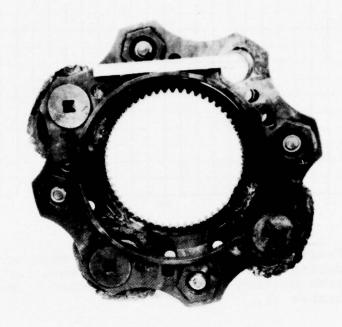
Lower planetary assembly after 25-minute loss-of-lube test of optimized transmission configuration number 1.
